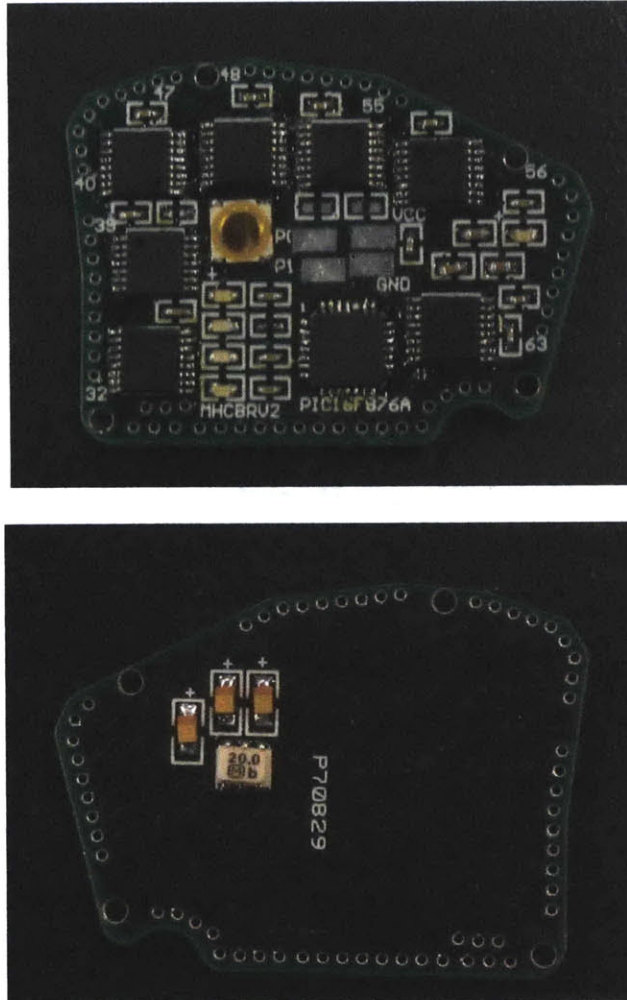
The Mid-Hand Circuit Board. The top of the circuit board is shown at top. The bottom of the circuit board is shown below.
